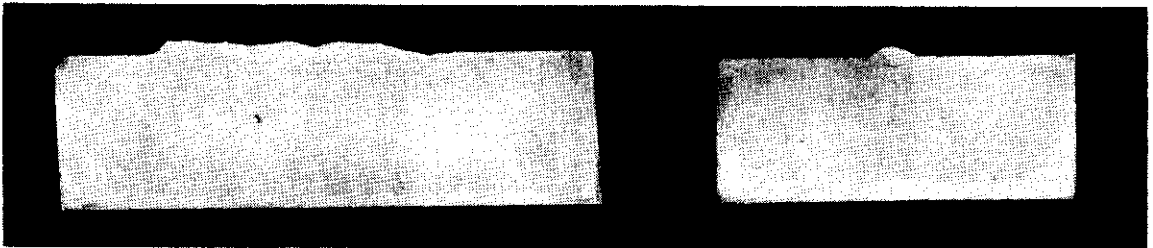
Single-bead weld specimen, showing typical magnaflux indications of under-bead cracks on longitudinal section along center line of weld bead.
